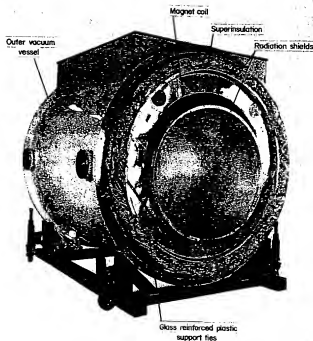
A superconducting magnet, designed for whole-body scanning, during assembly. A field in the range 0.5–1.5 T is produced in a bore of 1 m. (Courtesy of Oxford Magnet Technology Ltd.)
